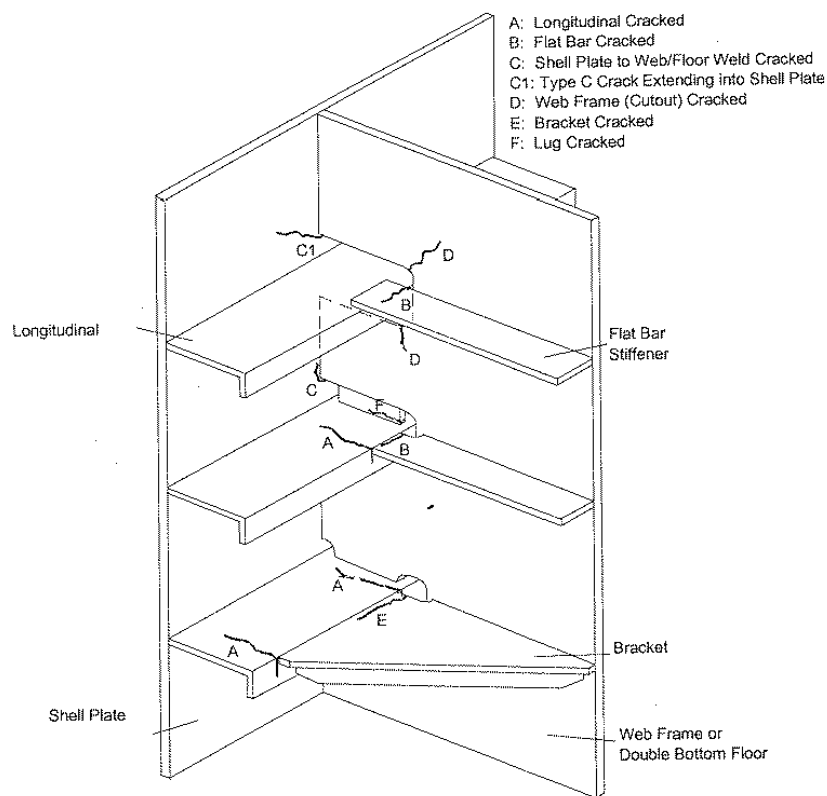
Typical cracks found in ship structural details (Bai, 2003)
